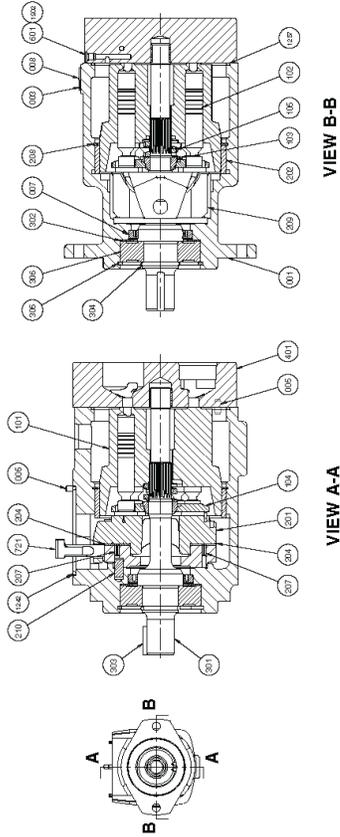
Exploded parts drawing, PVWJ-064/-076/-098/-130 C-Frame (520024-301 sheet 2 of 4).
